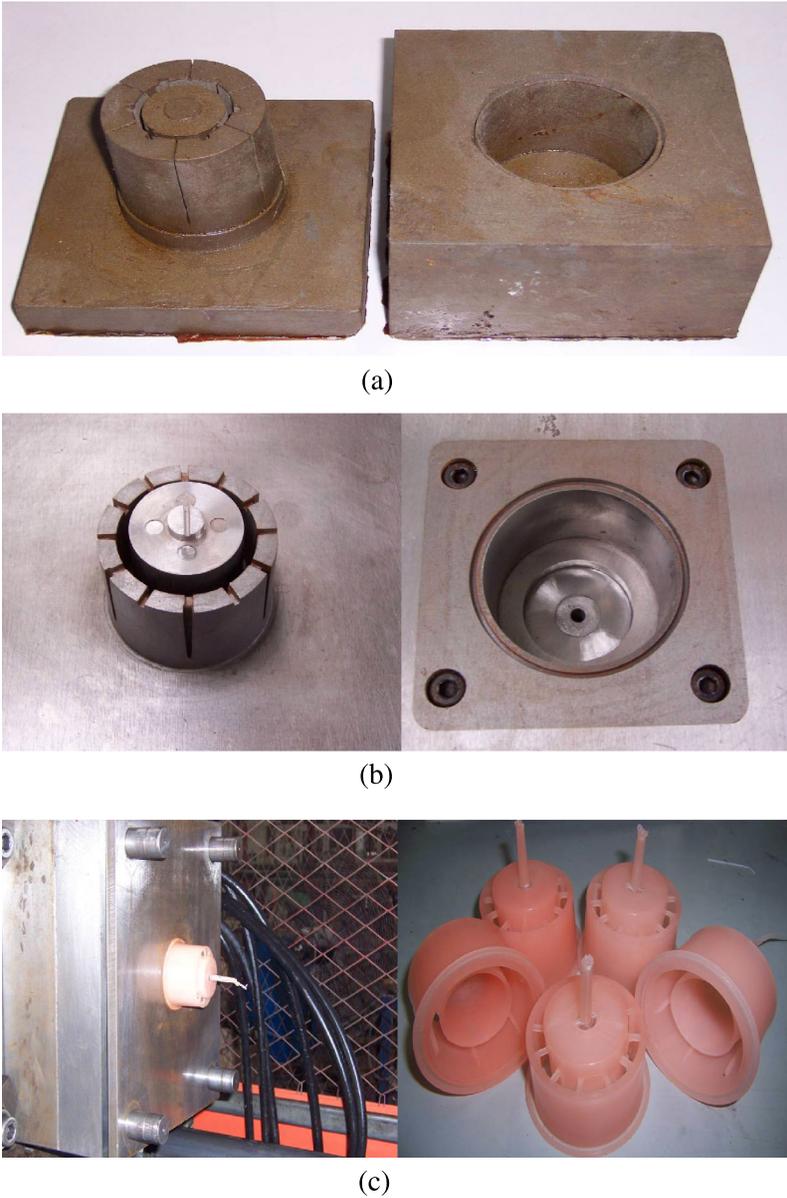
(a) Tooling inserts made of Fe/epoxy resin composites; (b) tooling inserts made of Fe/epoxy resin composites after machining; (c) plastic parts from the injection of the tooling inserts.
